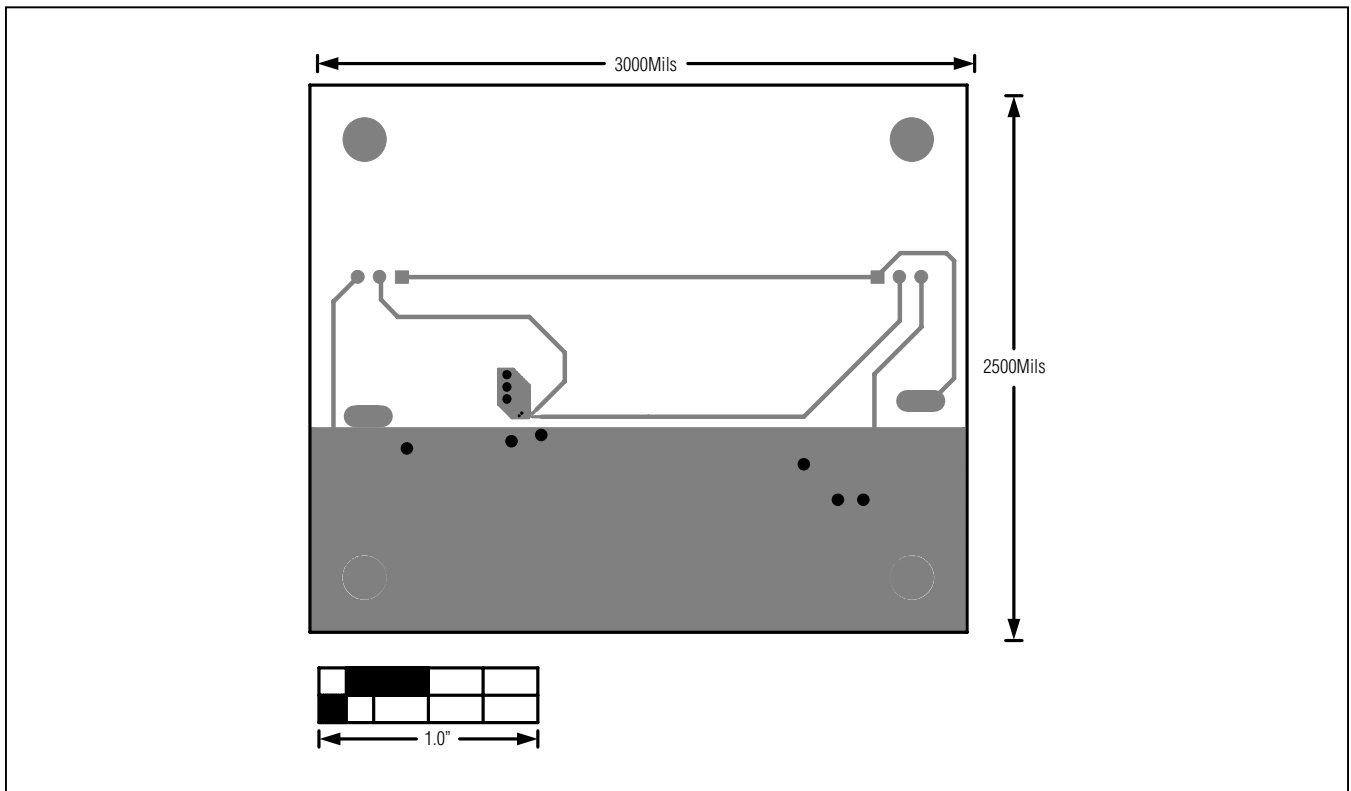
MAX8969 EV Kit PCB Layout—Solder Side
